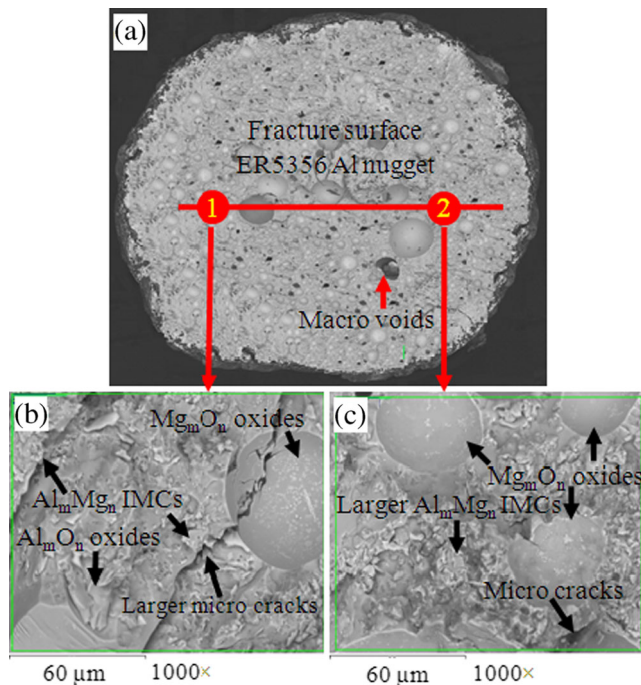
EDX analysis at fracture surface at ER5356 Al nugget
